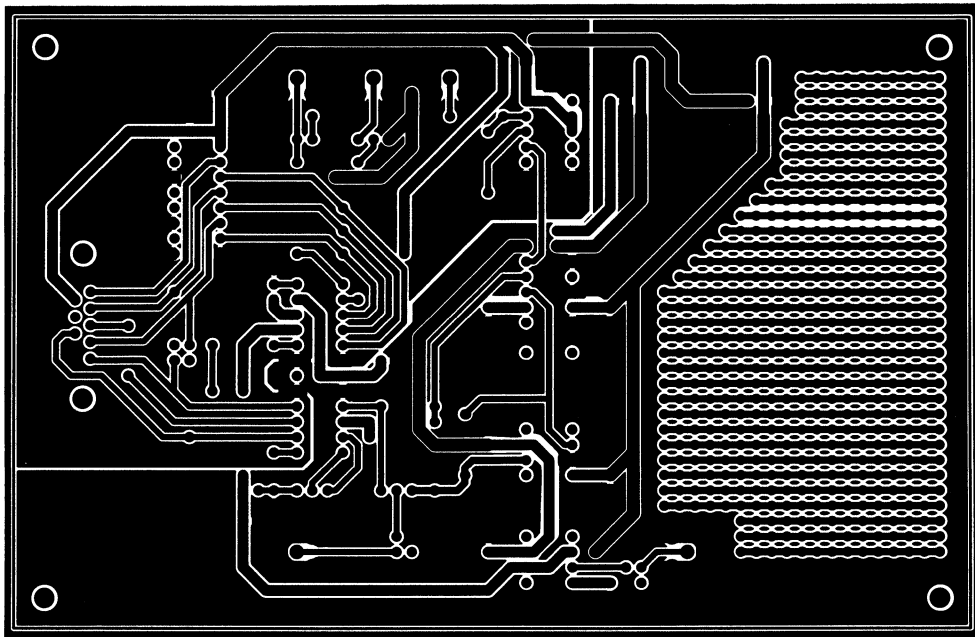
Solder Side Layout for the Circuit Diagram of Figure 19
